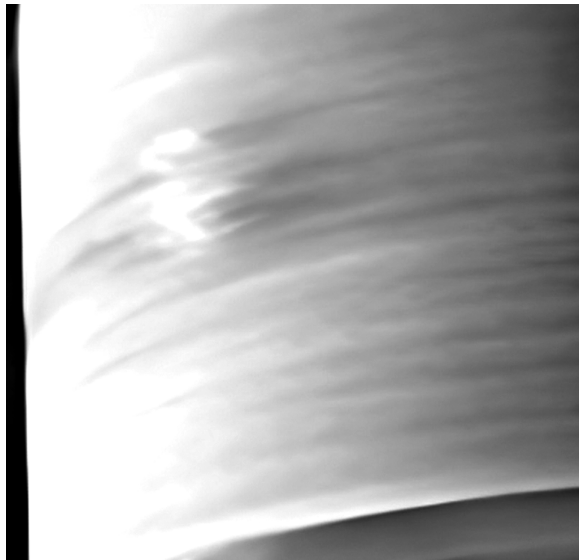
Machined Basalt/glass epoxy composite specimen.
